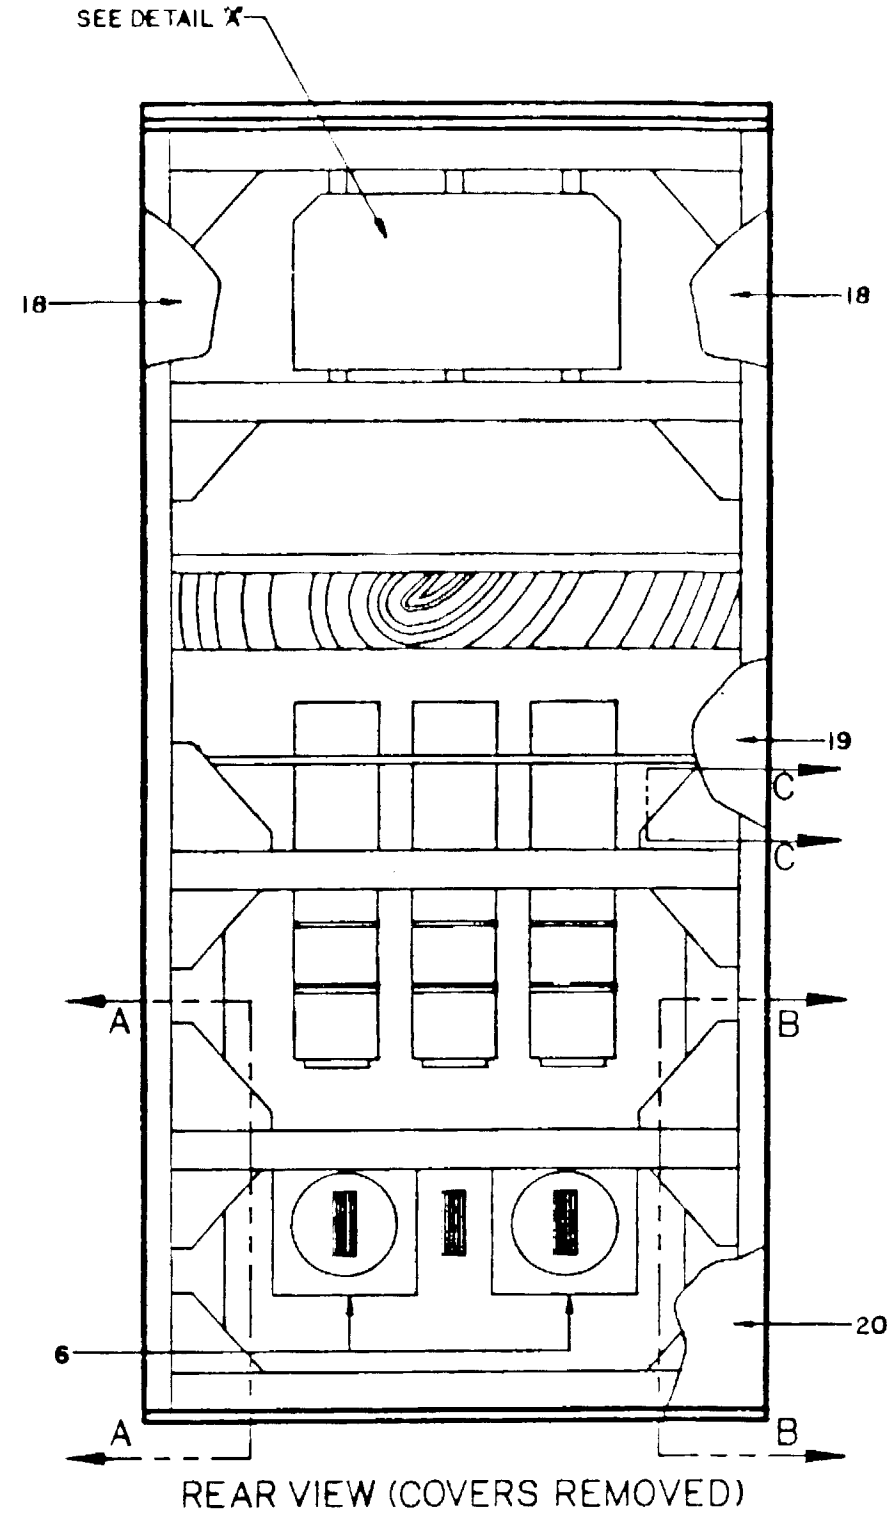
2SB Switchboard Assembly (Sheet 2 of 2)
